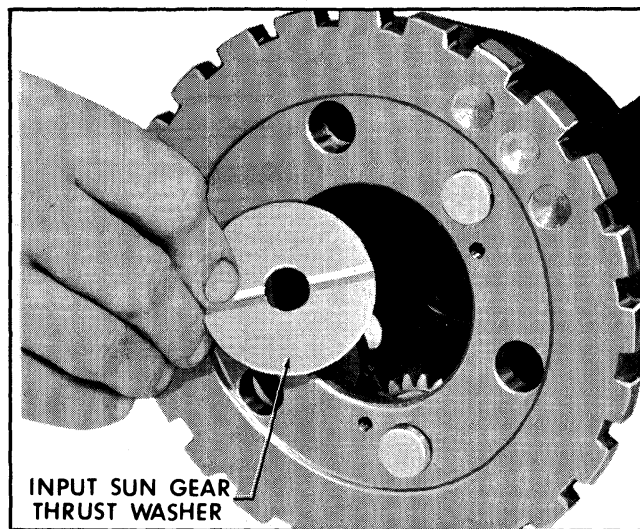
B-95 Installing Input Sun Gear Thrust Washer
